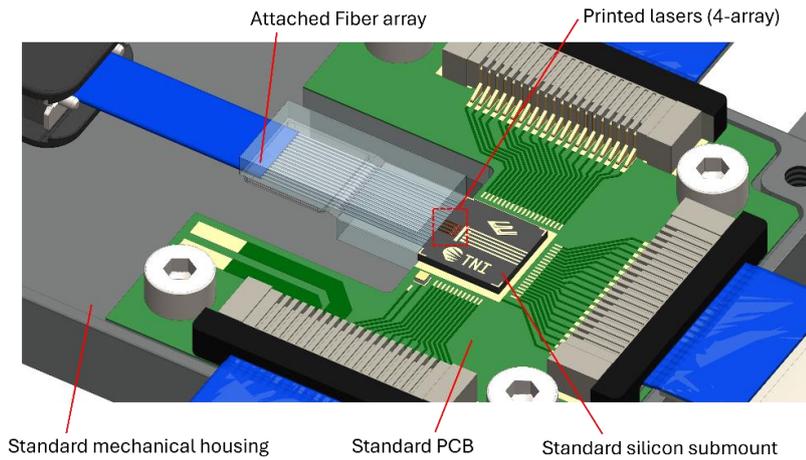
Overview of laser printing and packaging with Tyndall designed standard components
